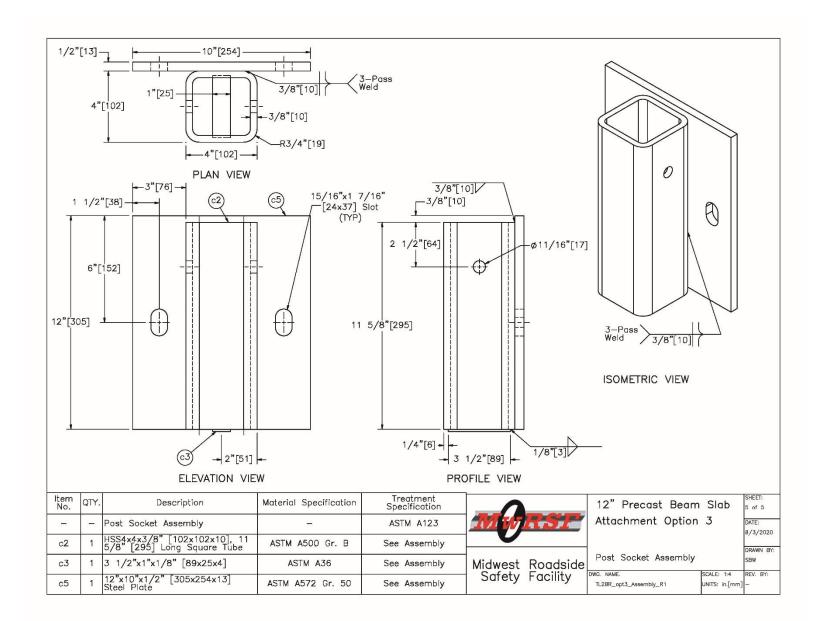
System Details, TL-2 Bridge Rail Attachment to 12-in. Deck, Option 3, Socket Assembly
